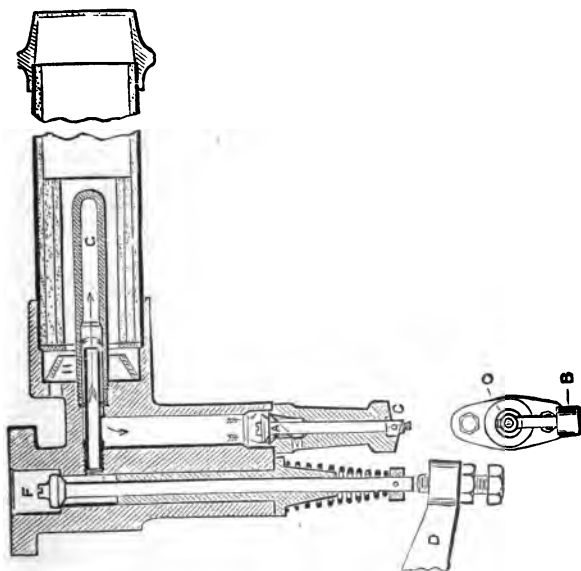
“Stockport” Gas Engine—Section of Timing Valve Bracket and Self-starter combined.
